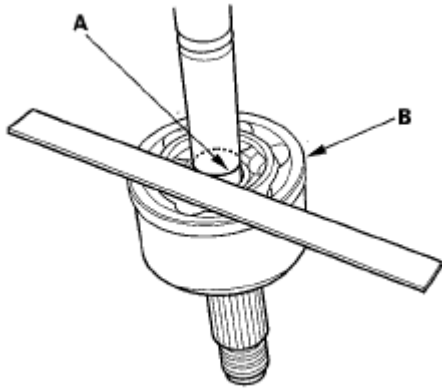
Checking Alignment Of Paint Mark With Outboard Joint End
